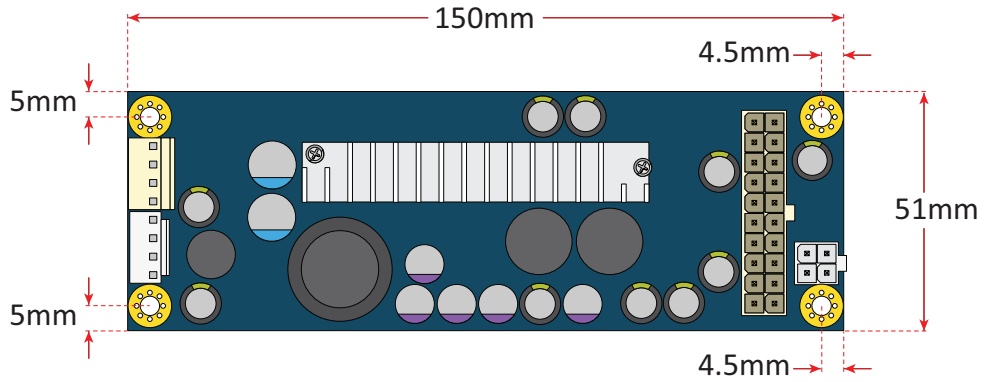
Mounting holes and dimensions of the PWB-M140 power board
